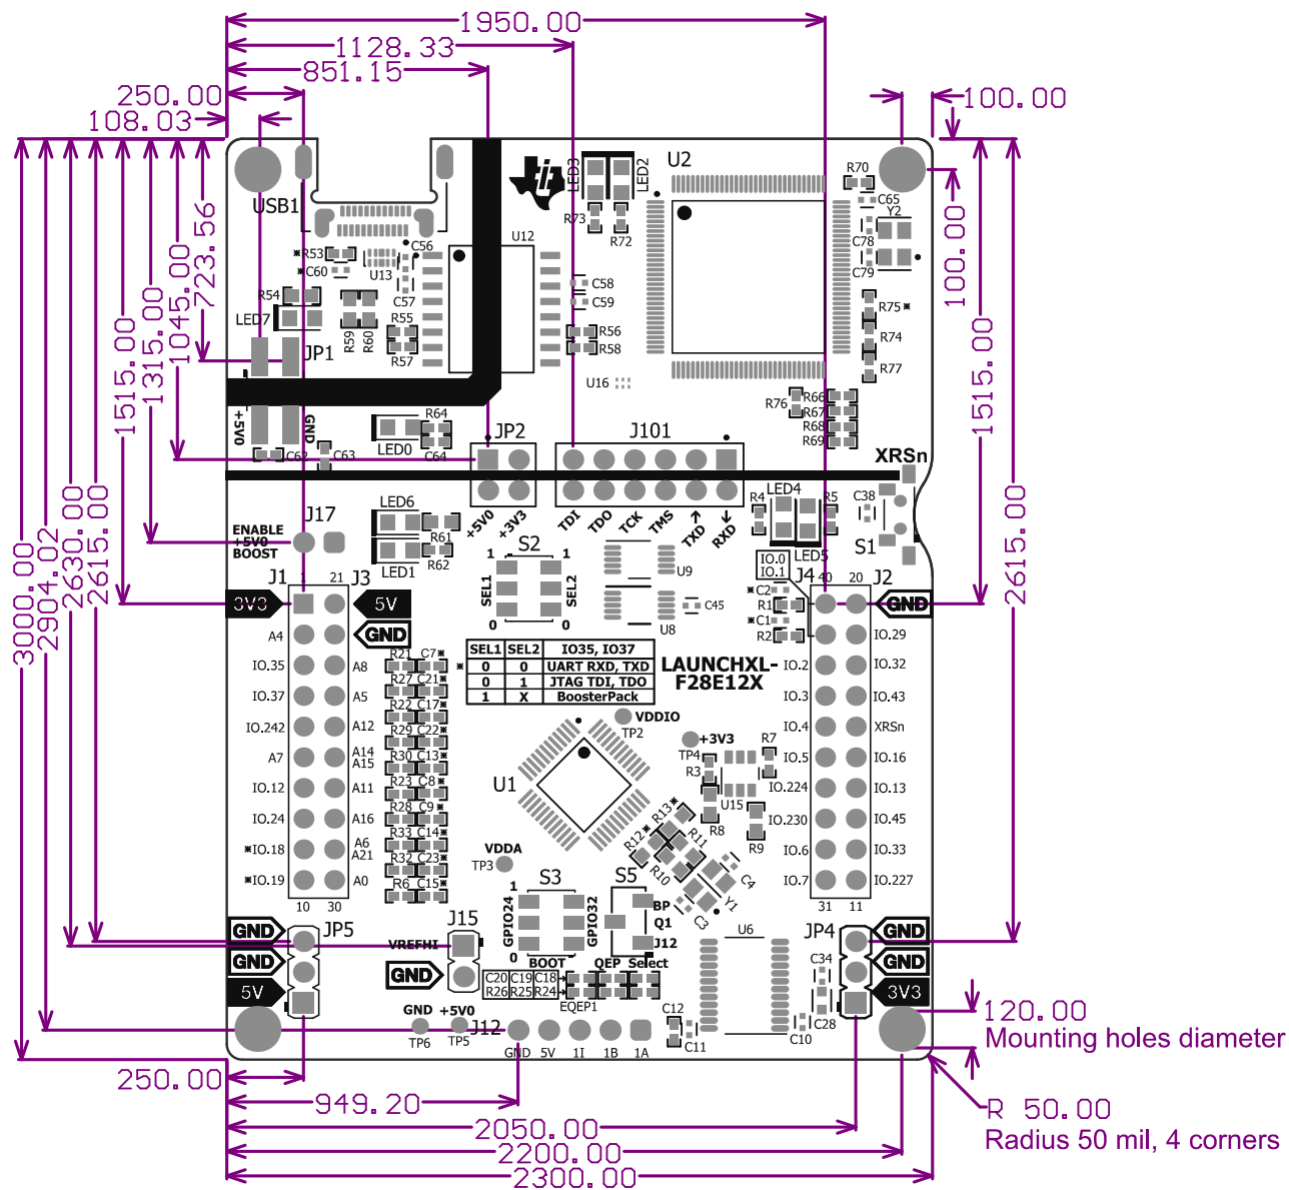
F28E12x LaunchPad Dimensions and Component Locations
